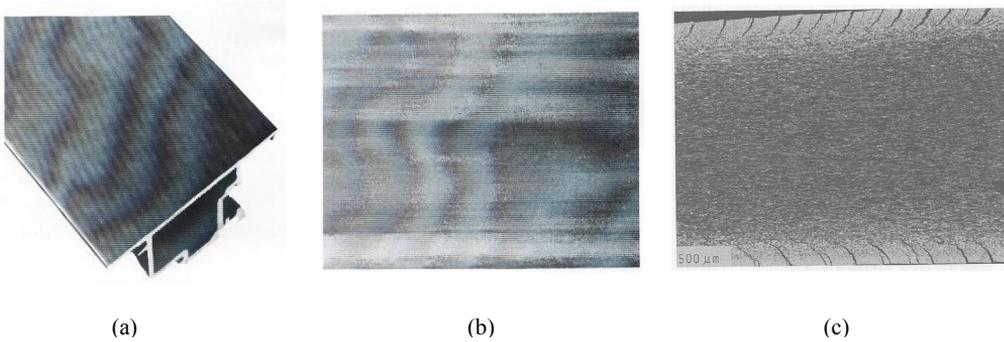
Surface appearance due to die design or bearing streaking (a), ingot (billet) structure streaking (b), and surface cracking / tearing (c) [Aluminum Association 1993, Sheppard 1999].
